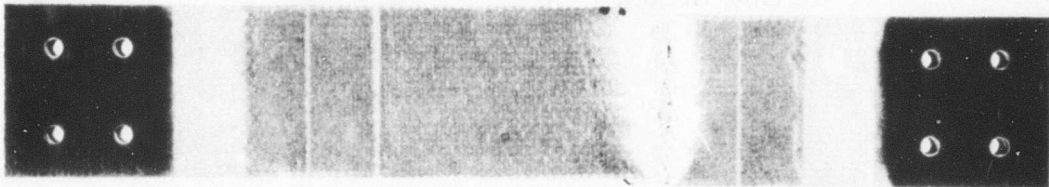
Specimen No. 3, Type II - Failure of Facing on Mold Side at Edge of Reinforcement.
